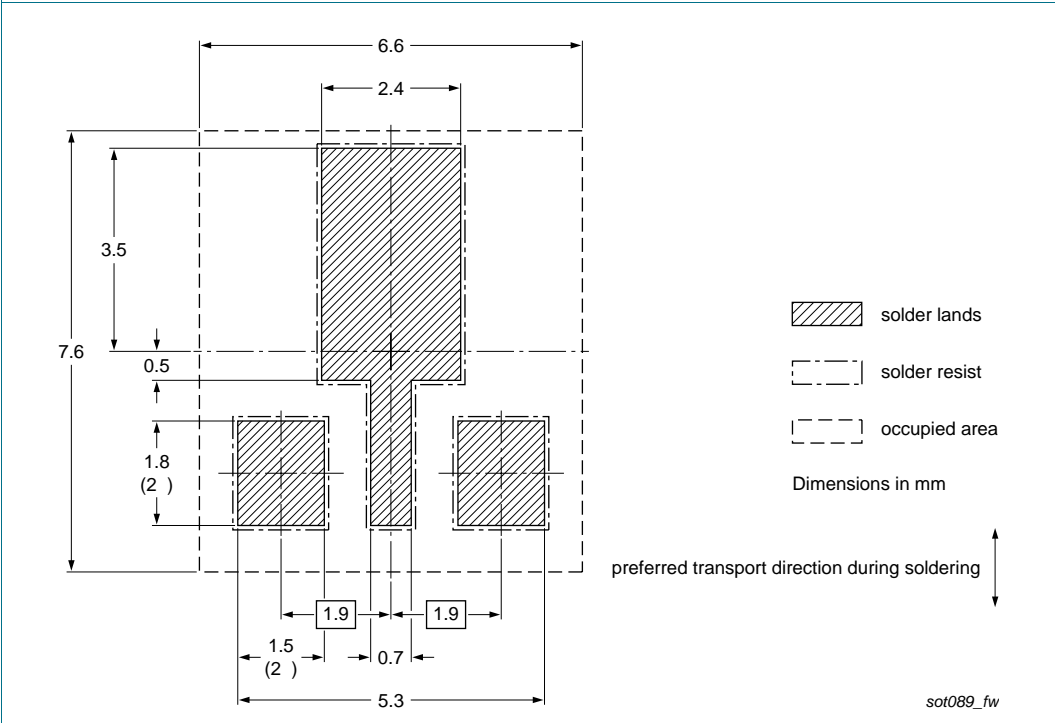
Wave soldering footprint PXTA92 (SOT89/SC-62)
